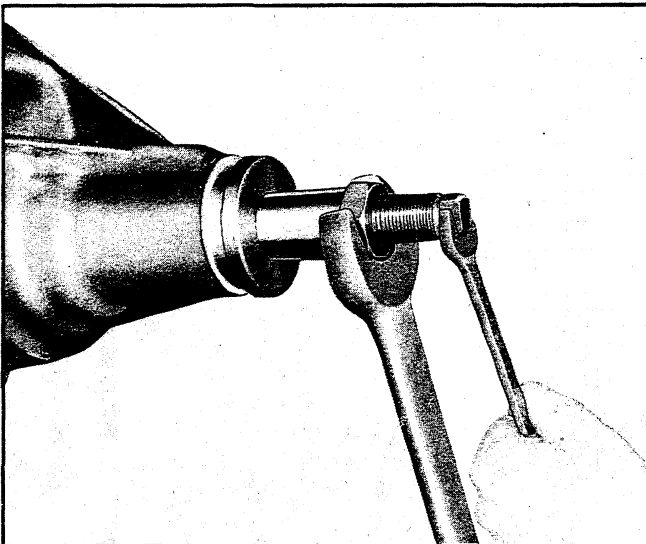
Drive Pinion Flange Oil Seal Installation (Light-Duty)
